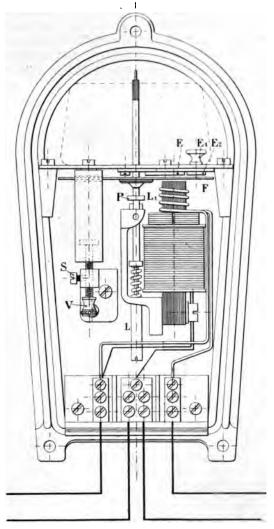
BAT METER. DIAL TRAIN AND TOP BEARING REMOVED.
